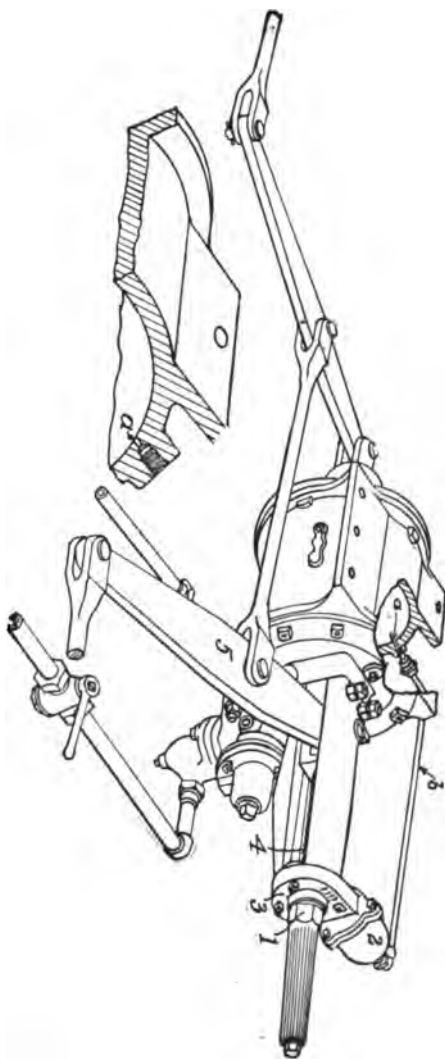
, SEC. 10*4*g.—A passenger brake cylinder with automatic slack adjuster showing lever connections.
